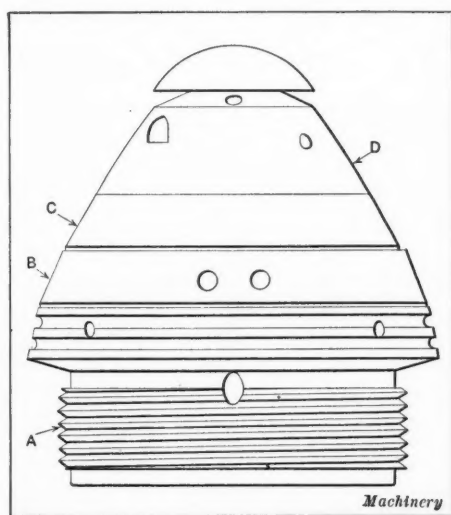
Assembled View of Russian 75-millimeter Shrapnel Fuse
